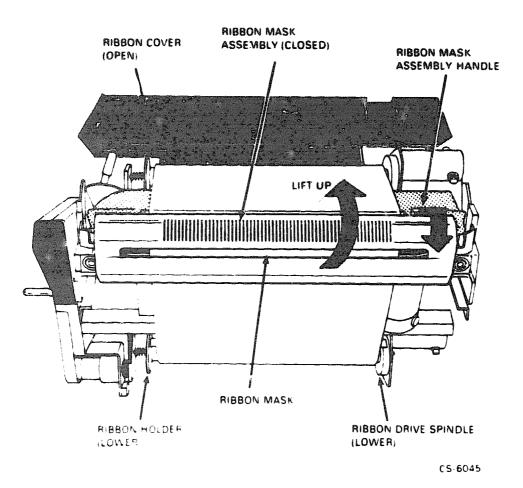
Ribbon Mask Assembly, Closed (Rear of Band Gate Assembly)
